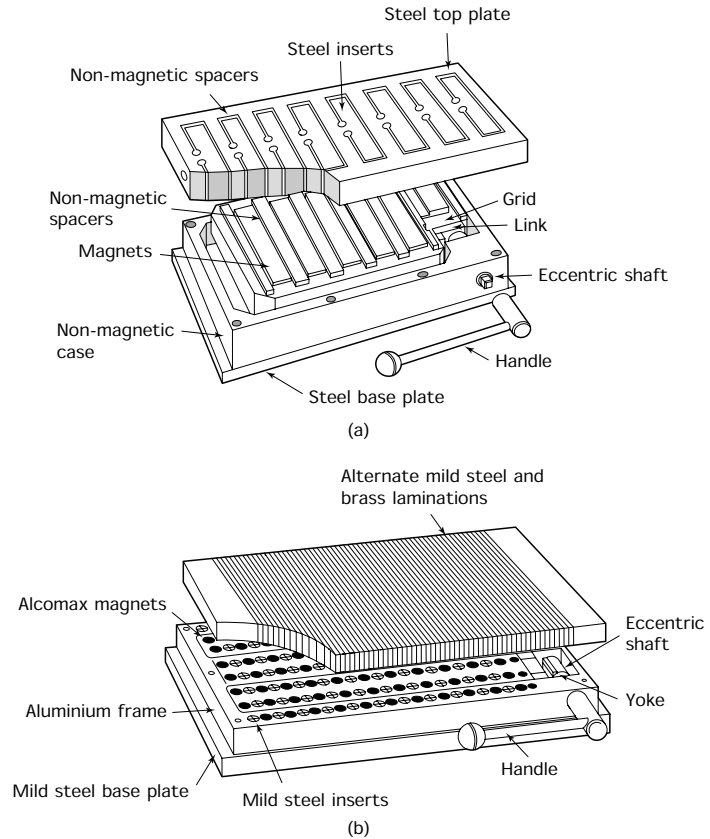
The magnetic chuck: (a) standard type chuck; (b) fine pole type chuck (reproduced courtesy of Eclipse Magnetics Ltd)
